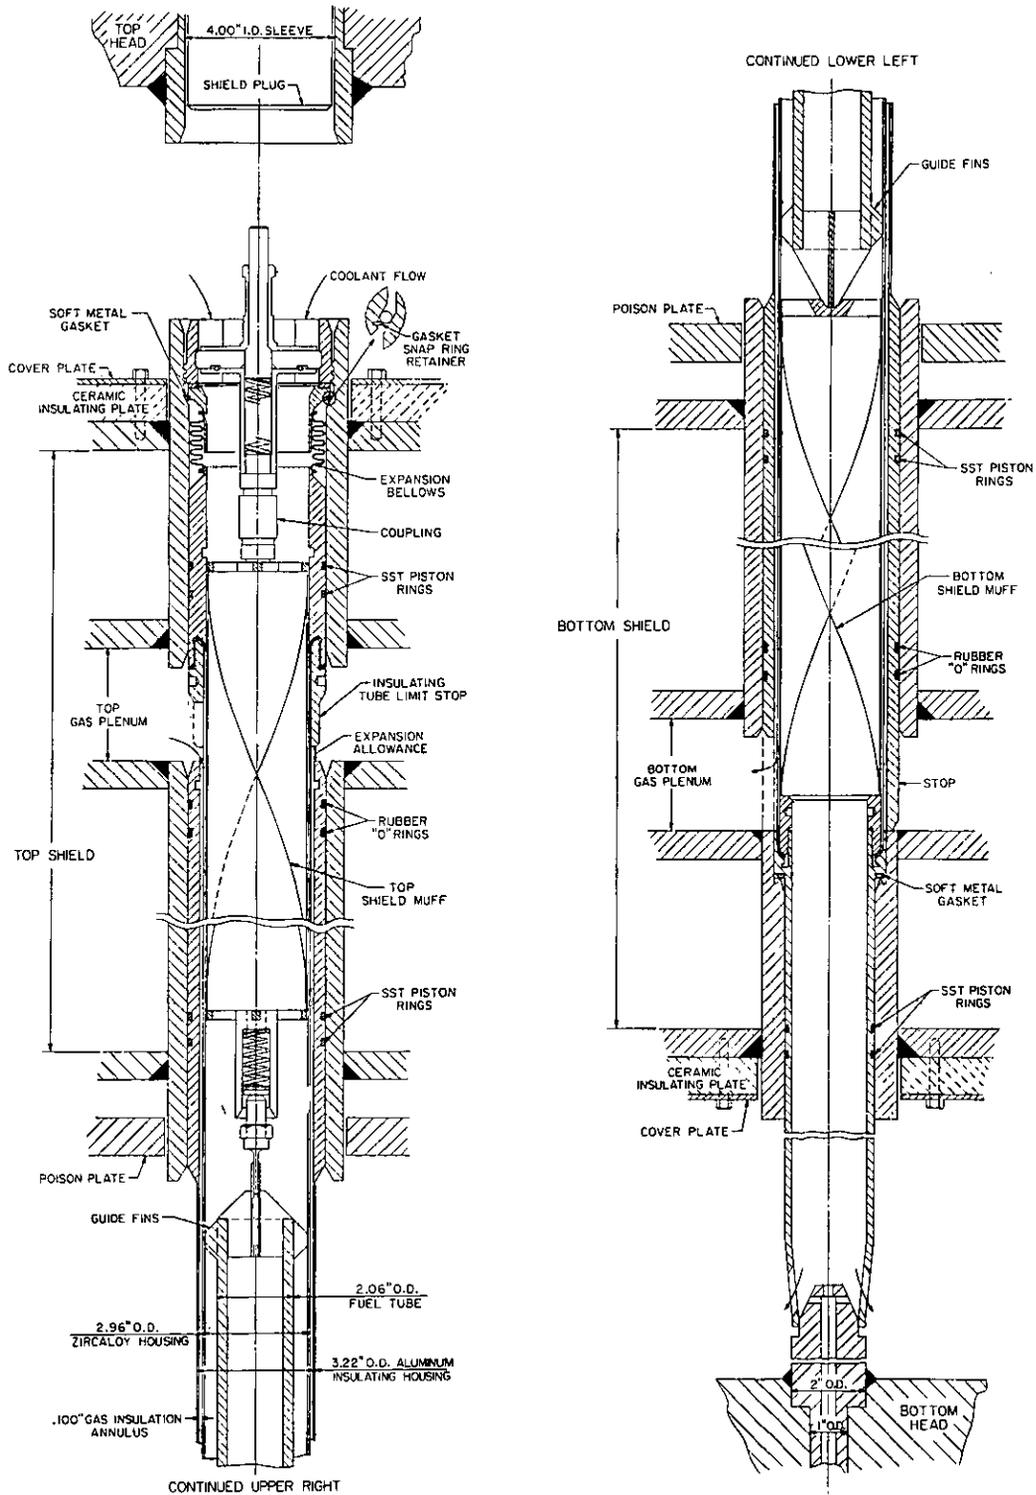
FUEL AND HOUSING TUBE ASSEMBLY FOR TYPE SB-5 AND SB-6 REACTORS
